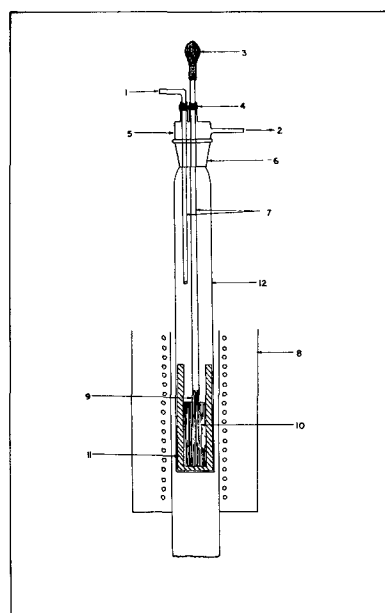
Apparatus for casting sound ingots: 1, inlet; 2, outlet; 3, rubber bulb; 4, rubber tube; 5, Pyrex glass; 6, ground joint; 7, quartz tubes; 8, furnace; 9, arrested cavity; 10, molten material; 11, graphite mold; 12, quartz jacket.
